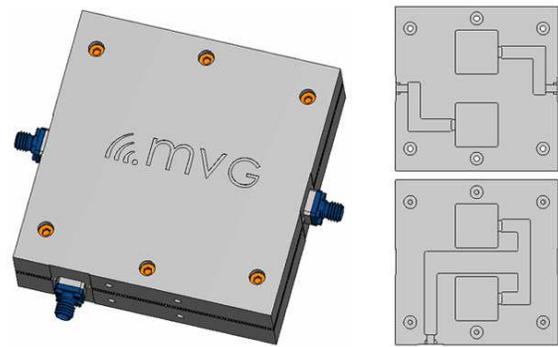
CAD view of the cased 3dB/180° coupler (left), view of the inner layout of the aluminum shells (right).
